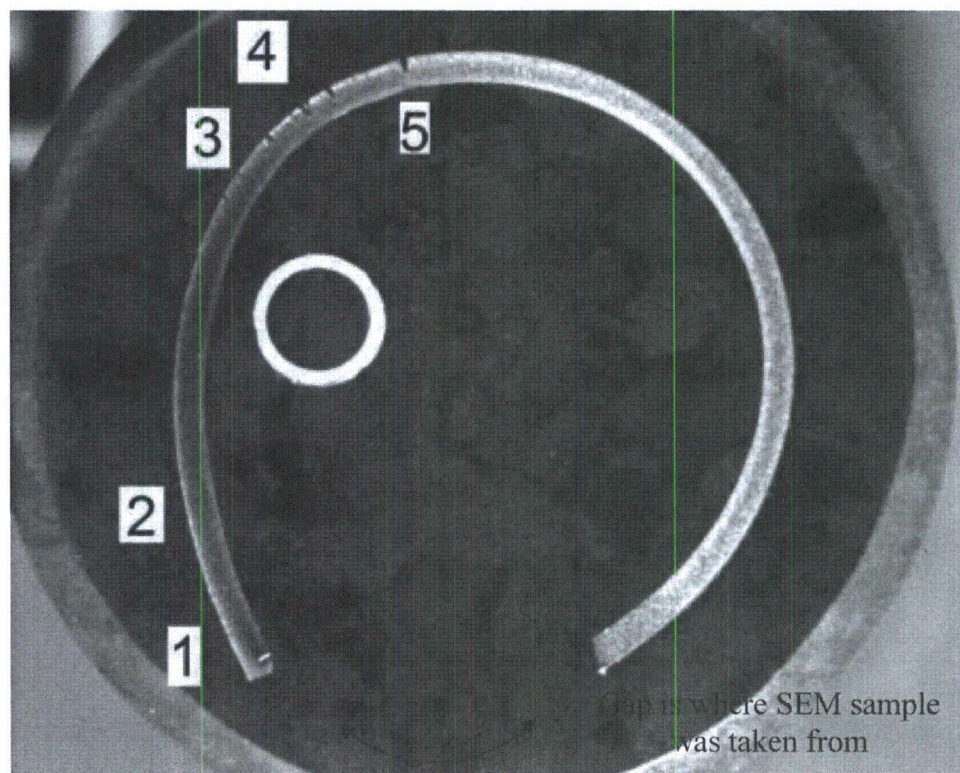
R24C41 04H - Overall View of Transverse Section
